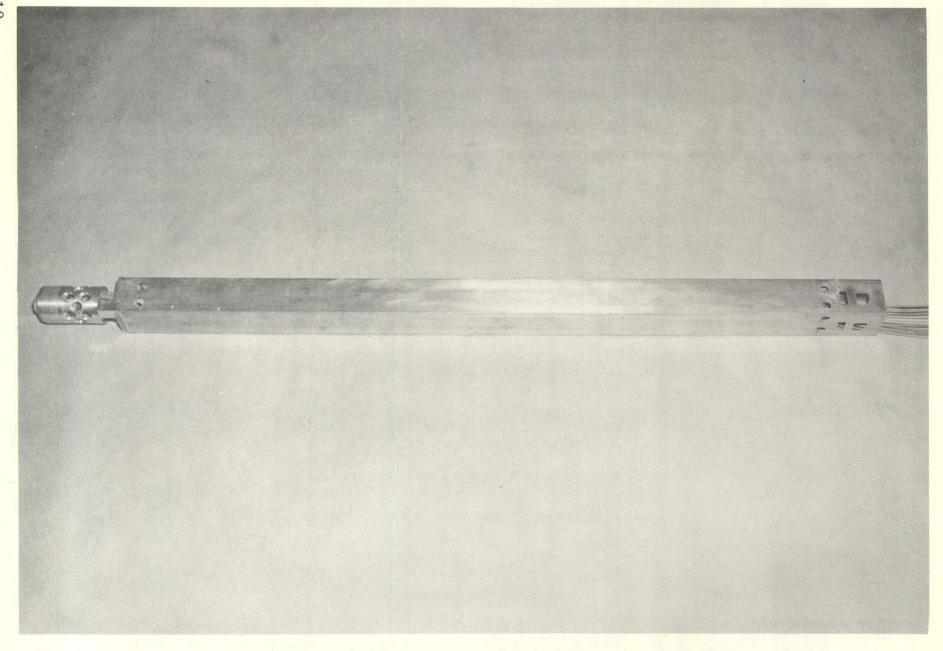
SM-1A Control Rod Assembly Assembled View
